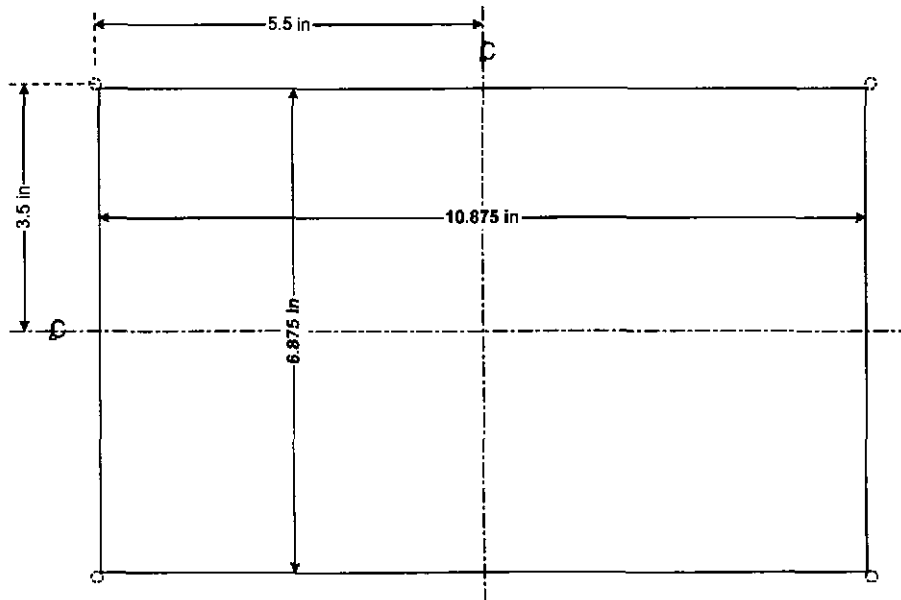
DOOR CUTOUT FOR ADAPTER FACEPLATE
